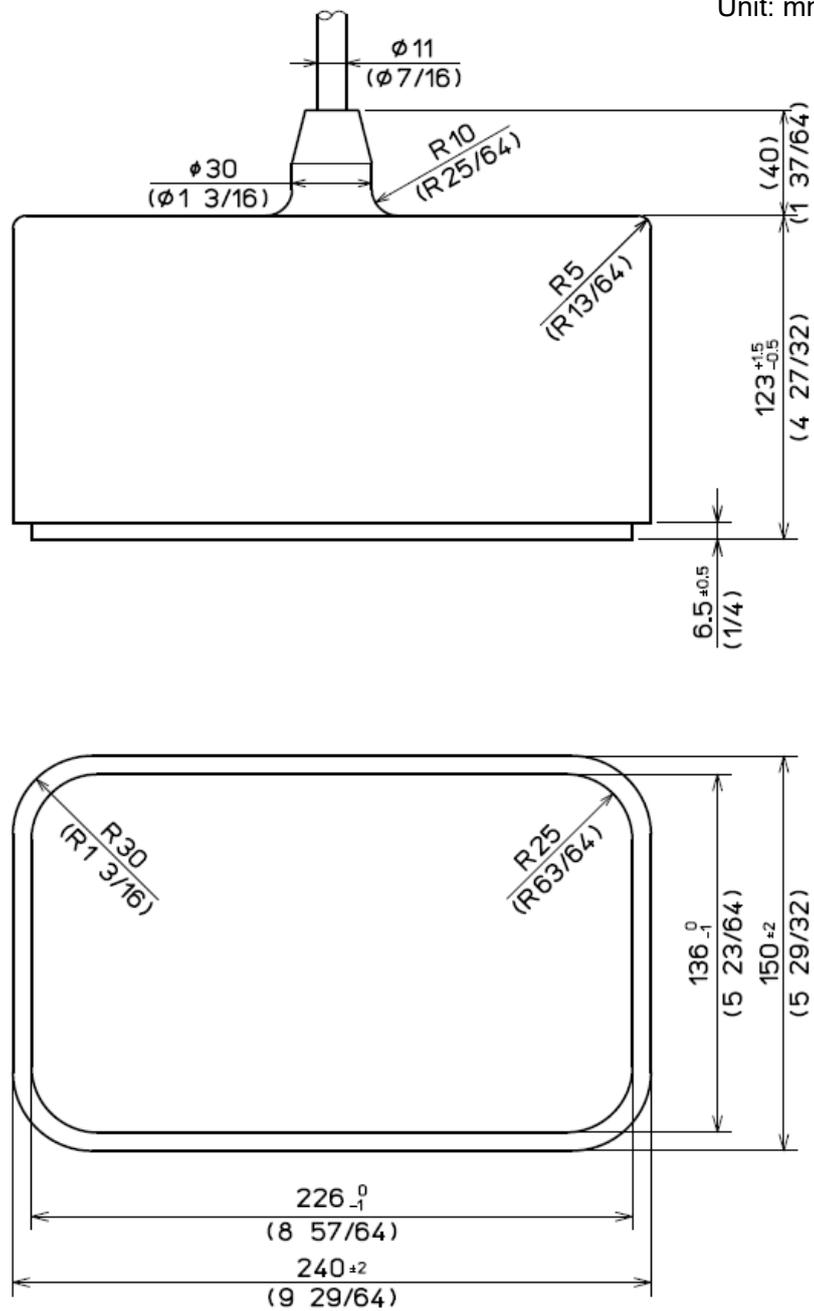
Outline dimensions of a transducer (TD-284A/TD-404T/TD-504T/ TD-504F)
